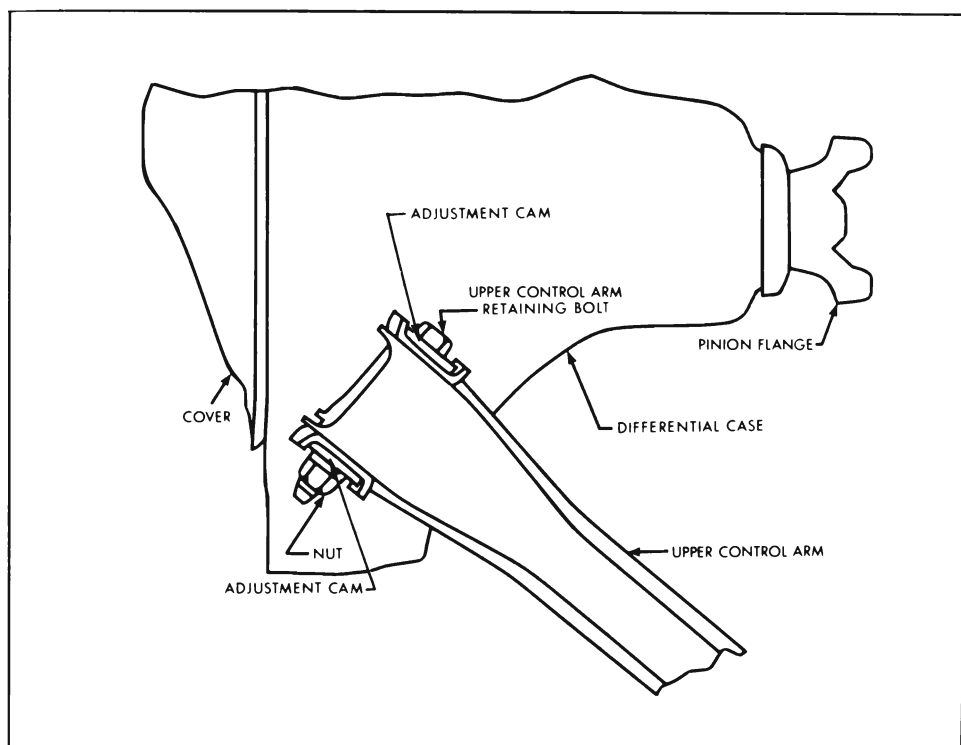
Upper Control Arm Cam Bolt Adjustment Assembly
